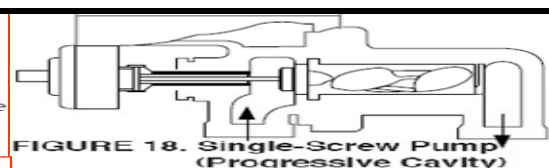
Single-Screw Pump (Progressive Cavity)
